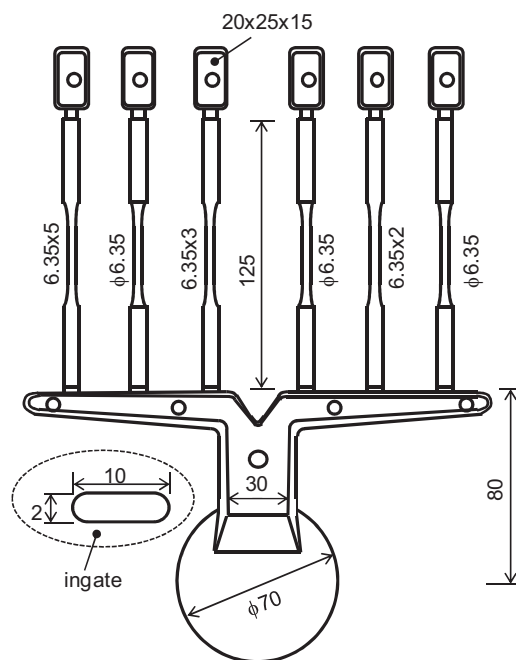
Diagram of die casting for the standard tensile testing samples of cast aluminium alloy according to the specification defined in ASTM B557-06. The overflow and biscuit are designed in association with the cold chamber die casting machine. The dimensions are in mm.
